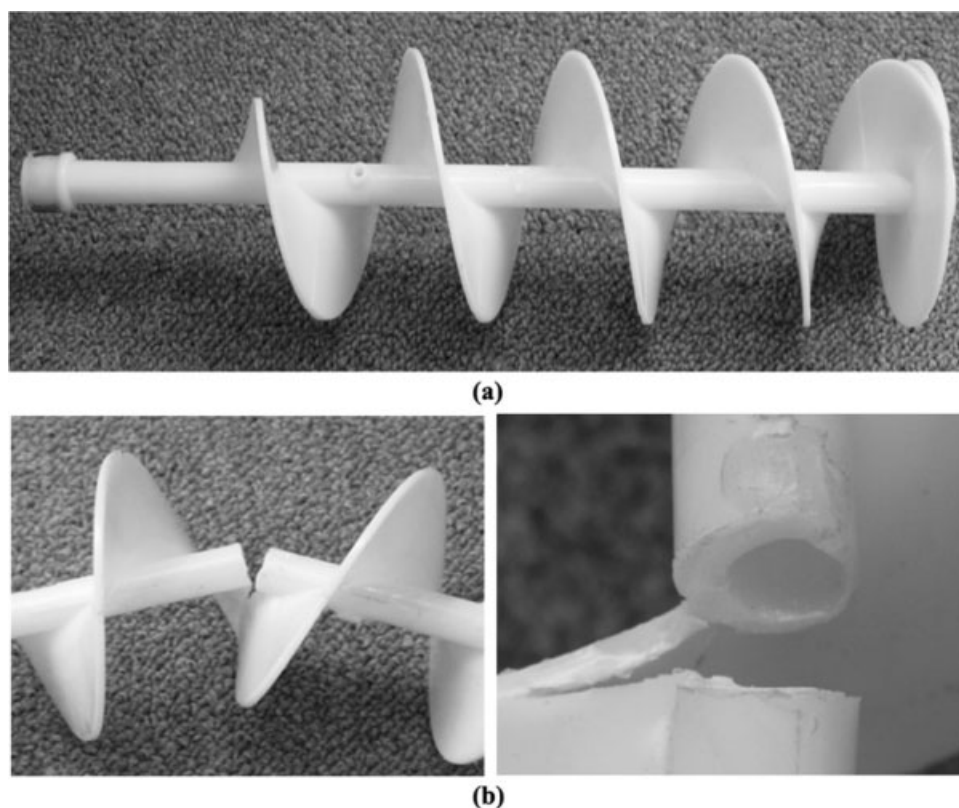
Images of the injection-molded screw and broken screw after equipped in ice water filter machine.
